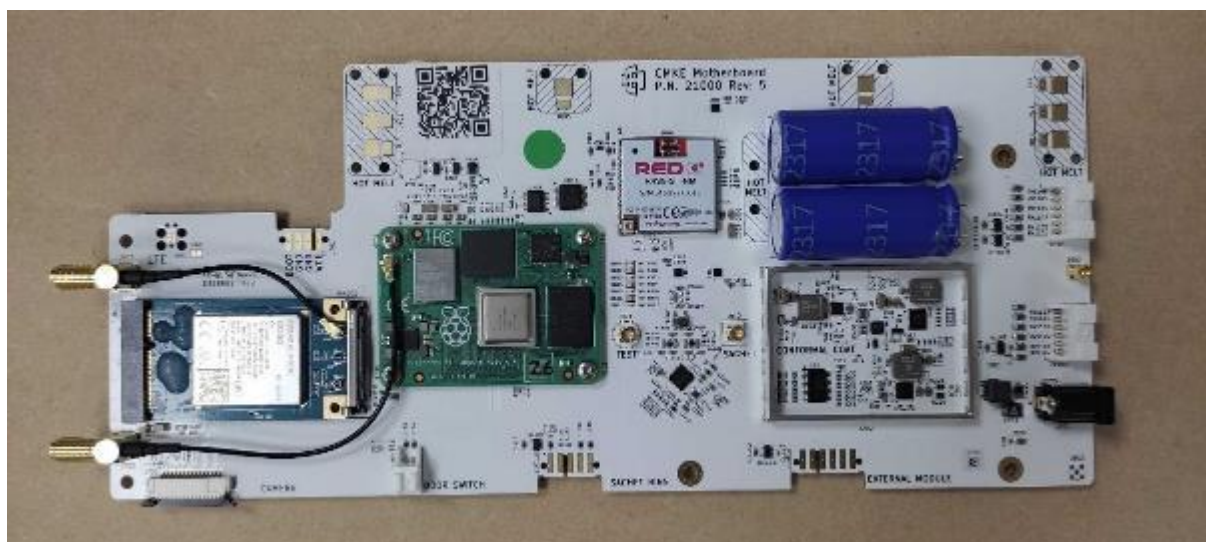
21000 CMKE Motherboard with attached CM4102008 & BG96
